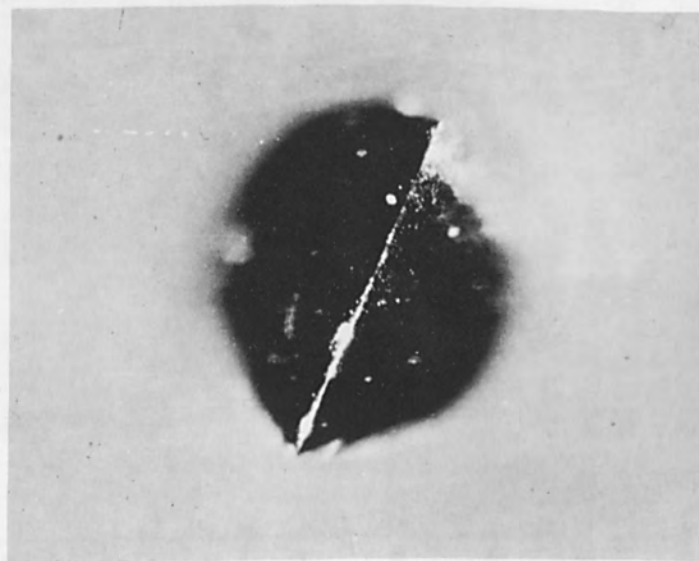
Chisel-Edge Fracture of Tungsten Single Crystal
